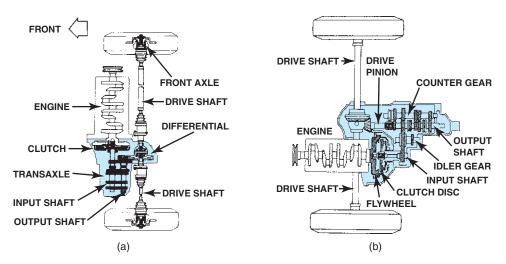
Transverse (a) and longitudinal (b) mounted FWD drivetrains. Note that (b) can easily be redesigned to drive a shaft to the rear wheels of a 4WD or AWD vehicle.
